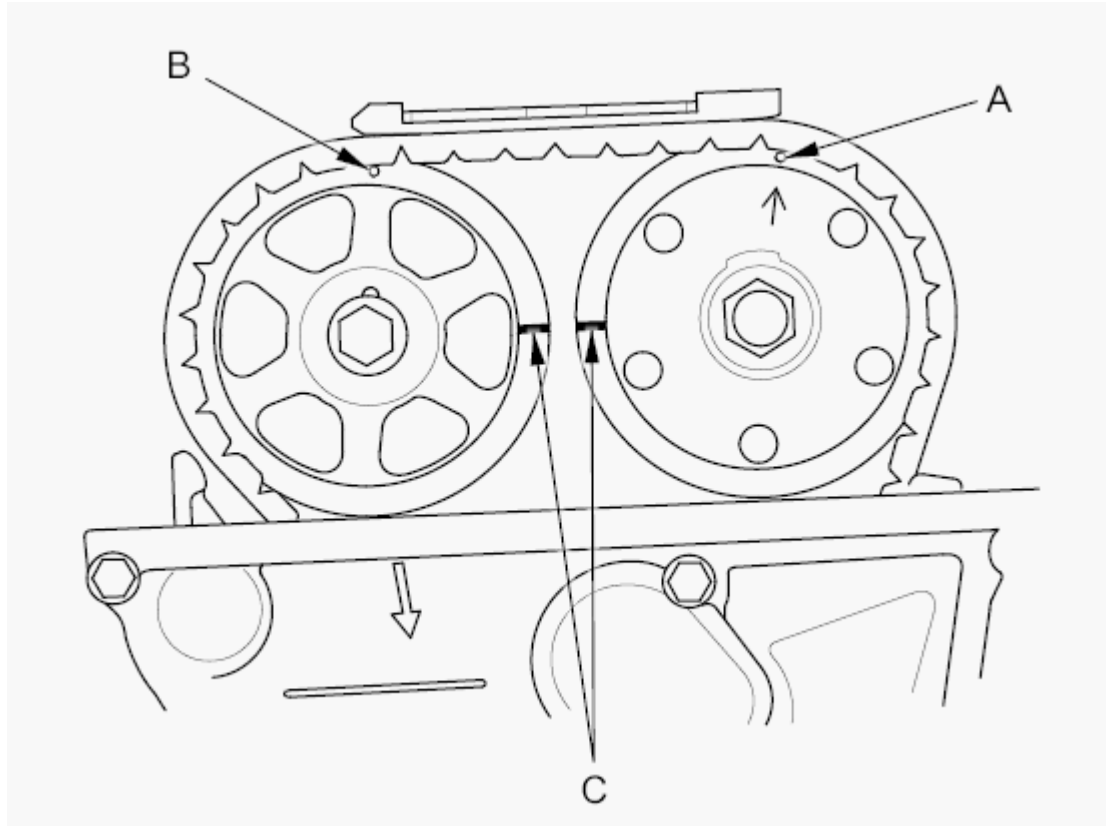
Aligning the TDC Marks On The VTC Actuator And The Exhaust Camshaft Sprocket.
